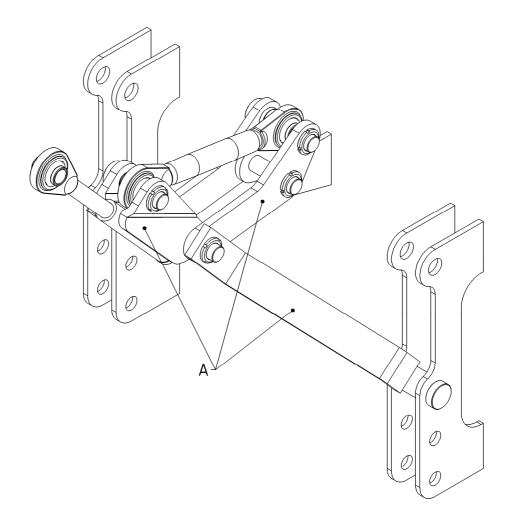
Rear-mounted hydraulic backhoe, folded loading arms
